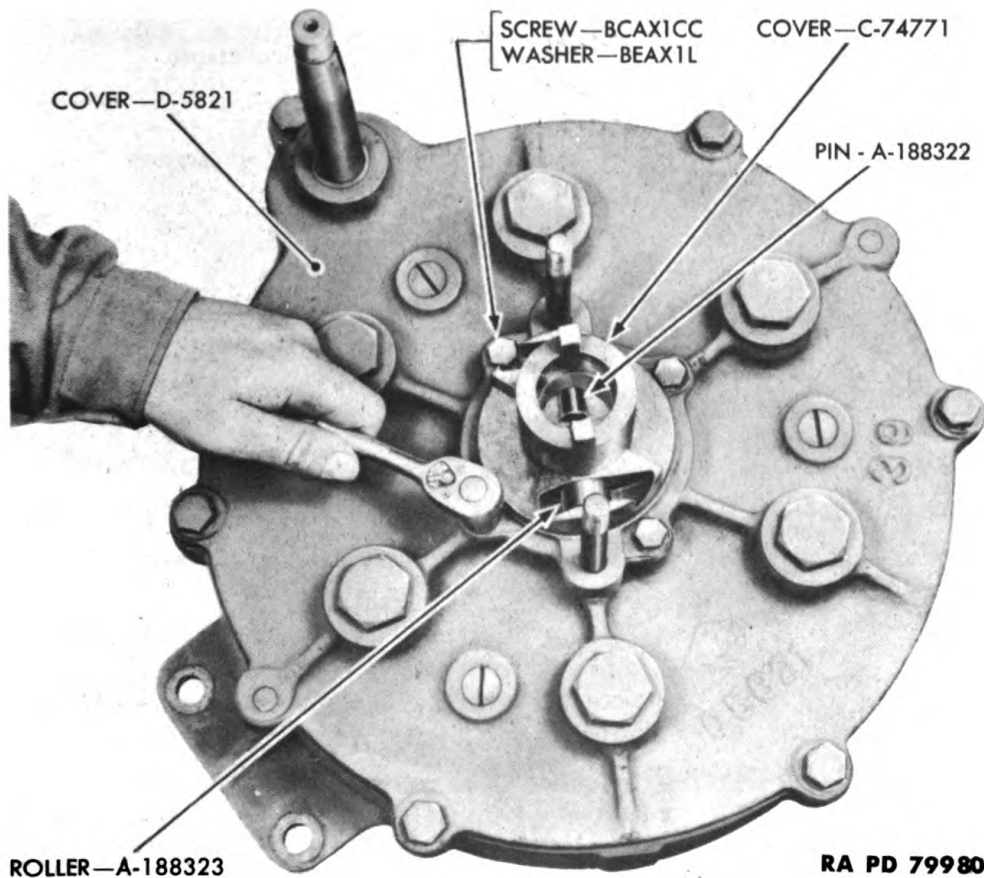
Removing Elevating Brake Drum Shaft End Cover
